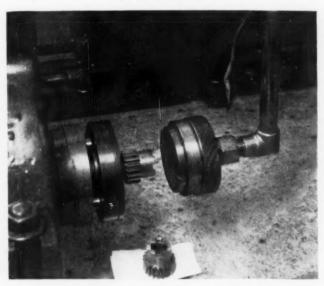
POSITIVE TOOTH CLUTCH FLAME-HARDENED
